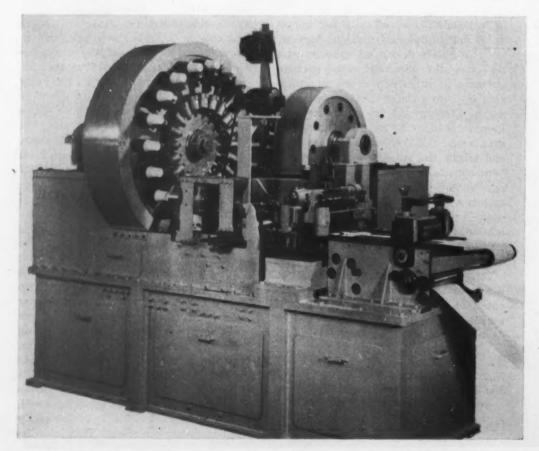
Machine for making paper containers employs two turrets and two concave barrel cams; indexes 67 to 75 times per minute
